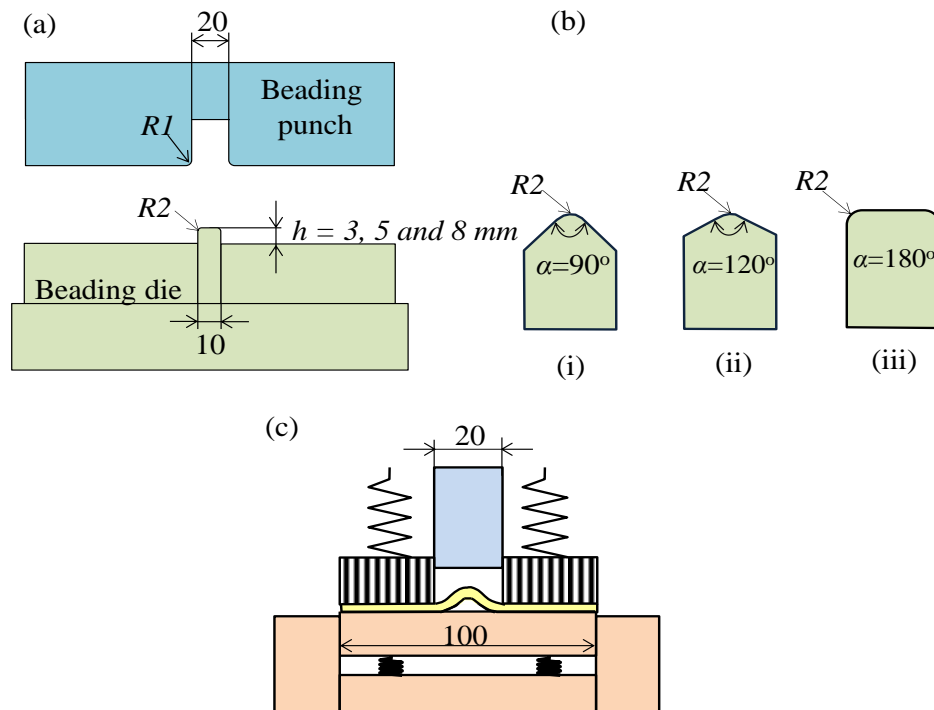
(a) Beading die, (b) types of beading die and (c) compression die dimensions.
